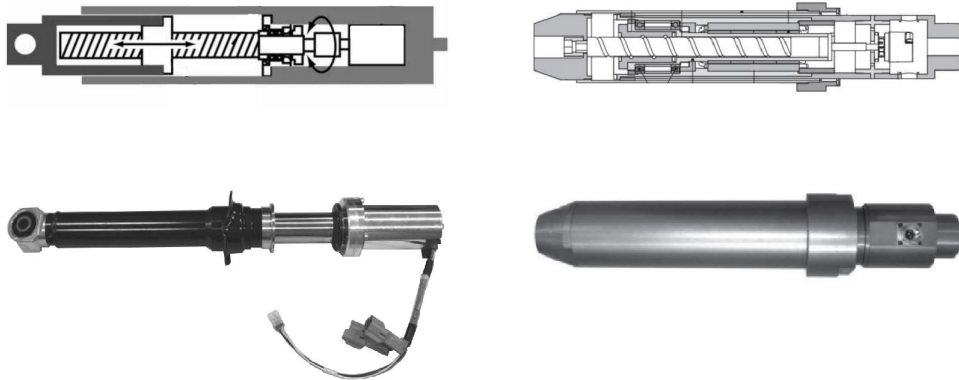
Ball screw mechanism layout: rotating screw (left) in [10] and rotating nut (right) in [11].
